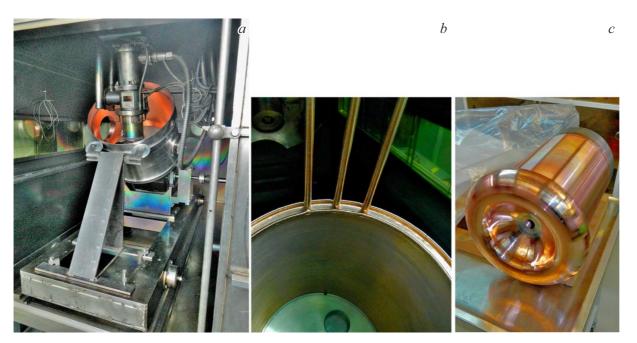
a — gear for welding of the front wall with the shell in the EBW vacuum camera and with EBW gun inside, b — ends of insert after EBW, c — insert appearance before EBW with rear wall of RF gun.
